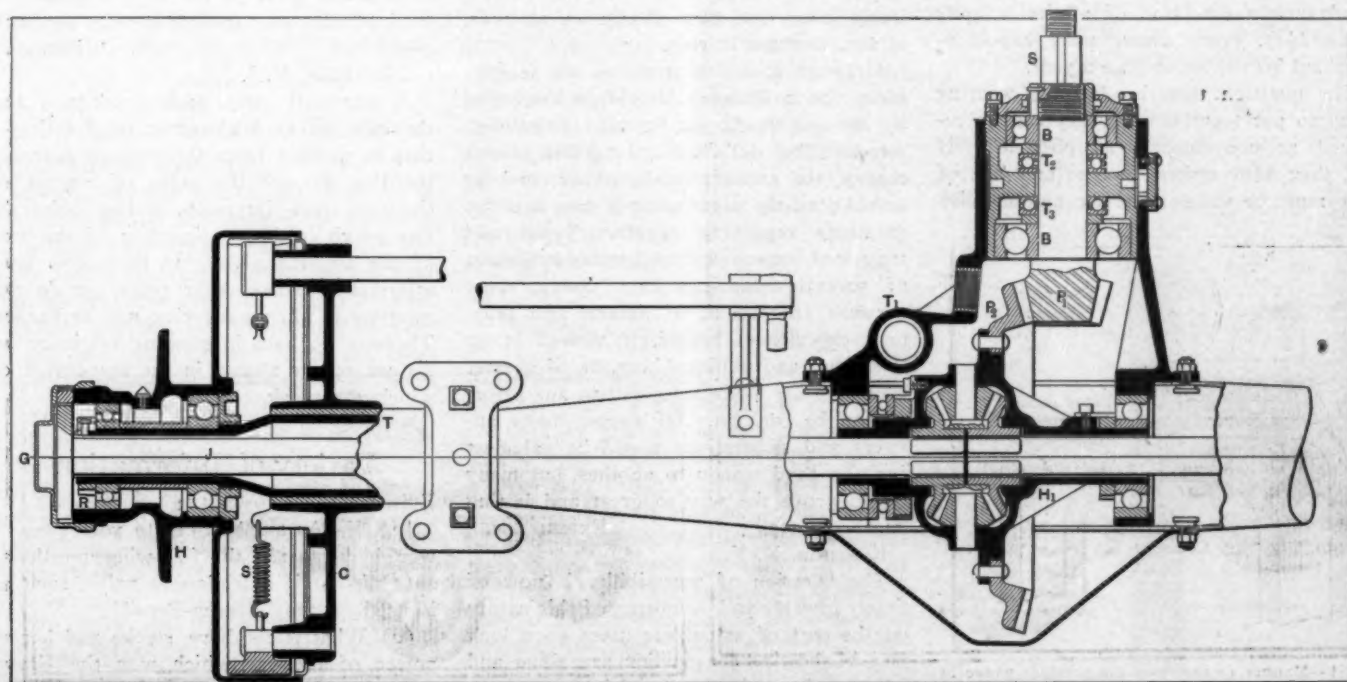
Sectional view through rear axle, showing differential, driving wheel and driving shaft ball-bearing supports
